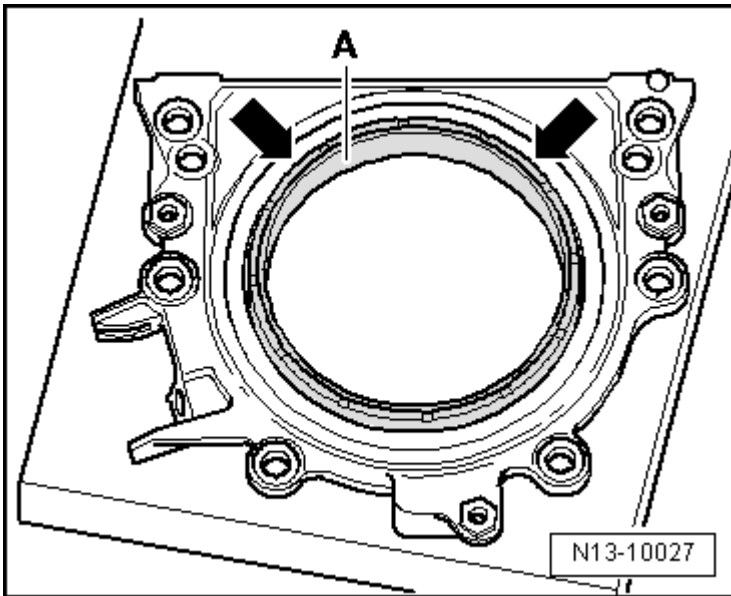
Identifying Sealing Lip Support Ring Pressed Until It Rests On Level Surface
